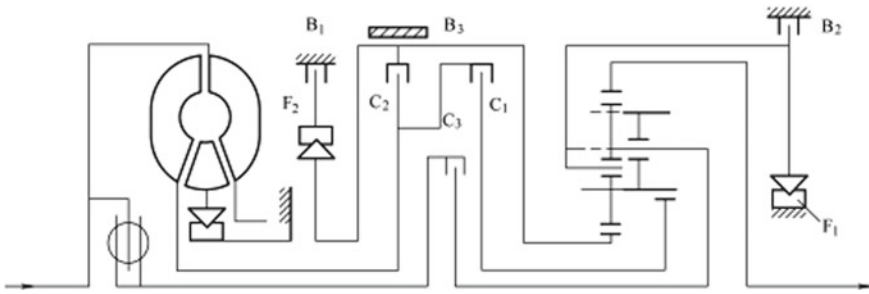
power-split 4 speed Ravigneaux planetary gear train. B₁—2 speed brake, B₂—low and reverse gear brake, B₃—2 speed pre-brake, C₁—forward clutch, C₂—reverse clutch, C₃—lockup clutch, F₁—1 speed OWC, F₂—2 speed OWC
